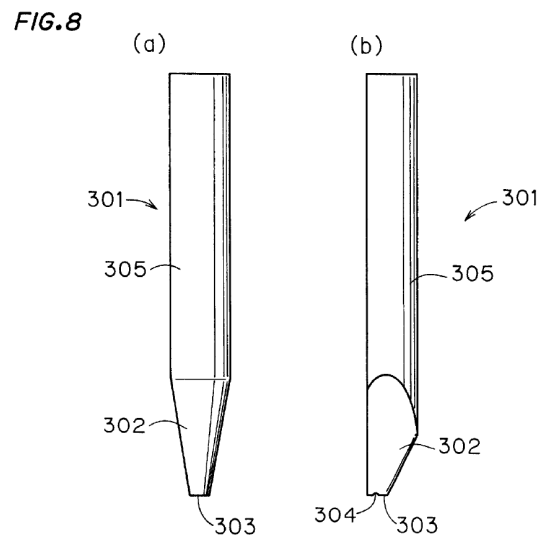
shows one embodiment of a wire bonding tool described in Mikaki. Ex. 1022, 15:24–25.
